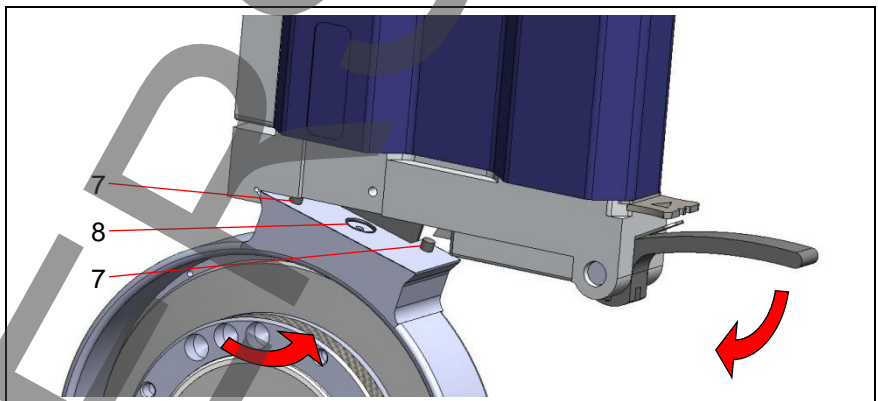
Fitting the WKS shear cut replacement head (here with the knife head left)
